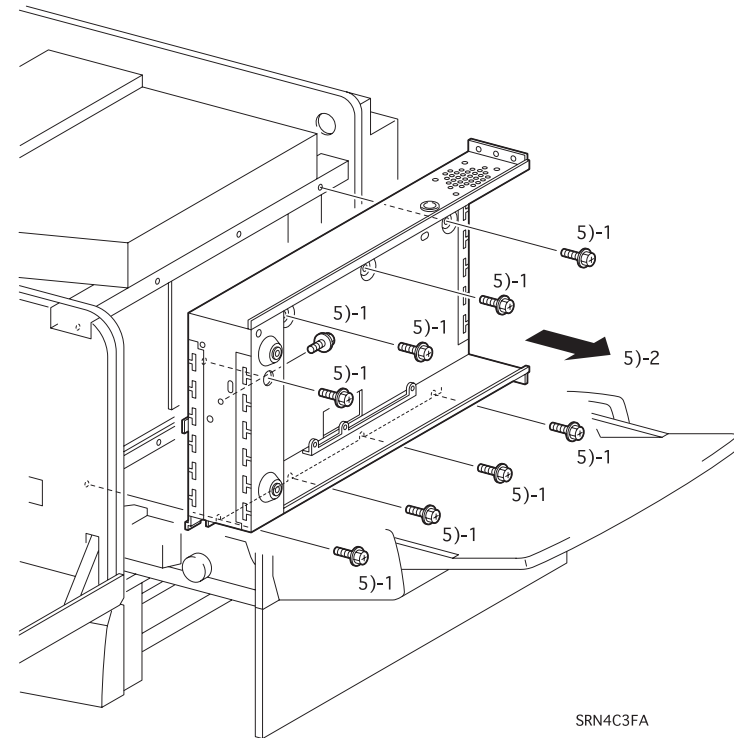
CONT. CHASSIS ASSEMBLY Removal
